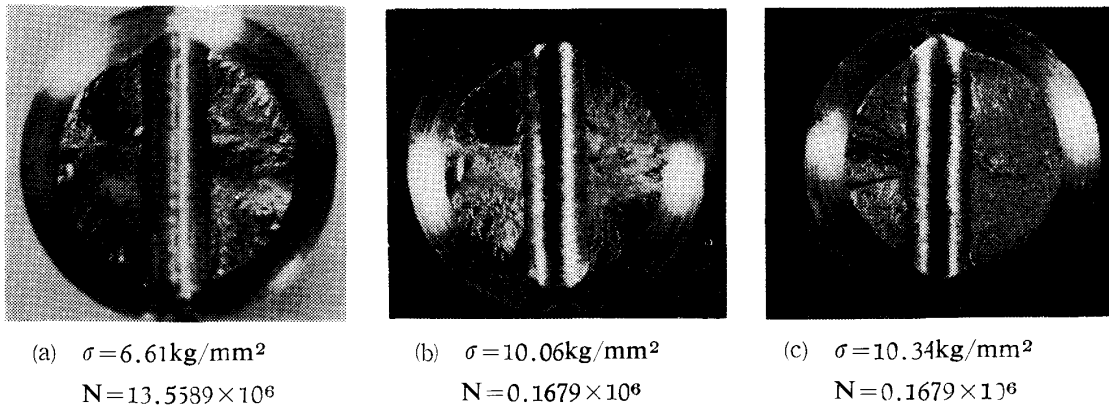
Fatigue fractures of semi-circular notched specimens with a 2.5mm hole.
